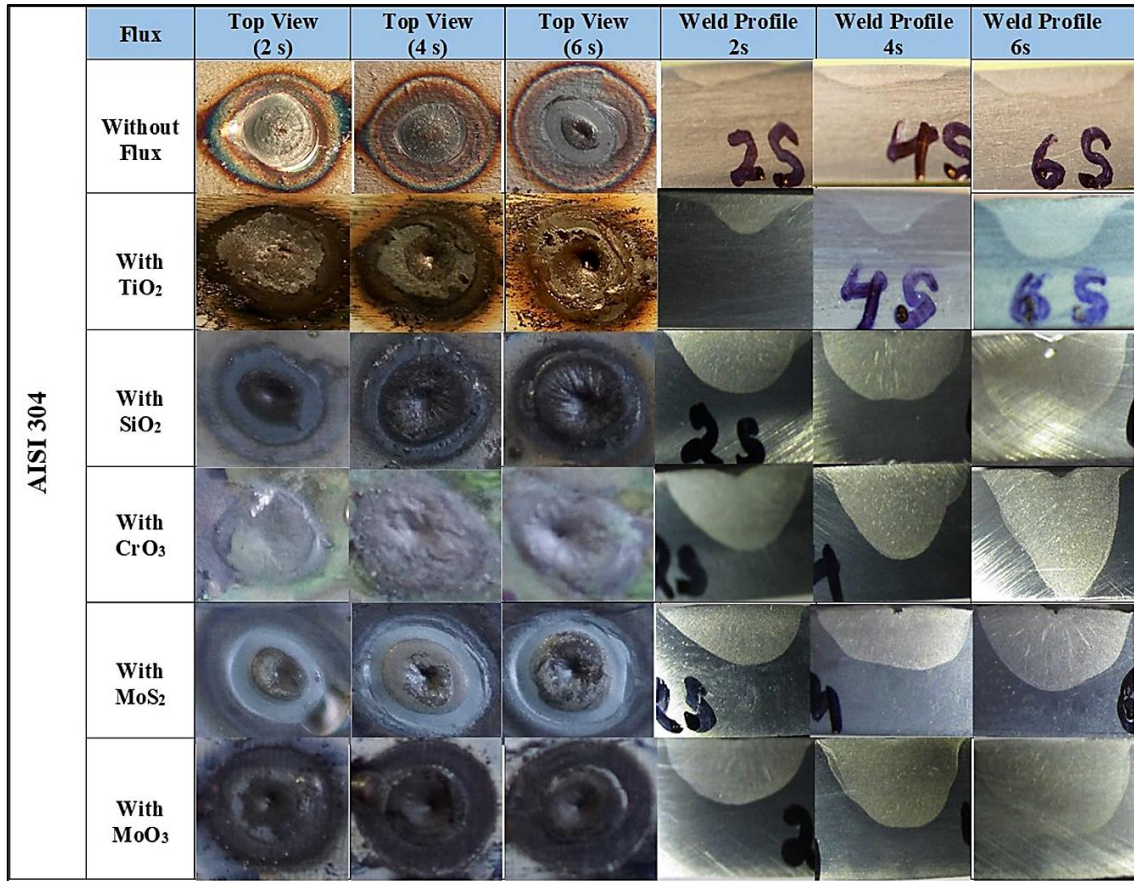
Showing the top surface and penetration of TIG and A-TIG welding of AISI 304 at different arc exposure times (i.e., 2s, 4s and 6s) using Ar shielding
